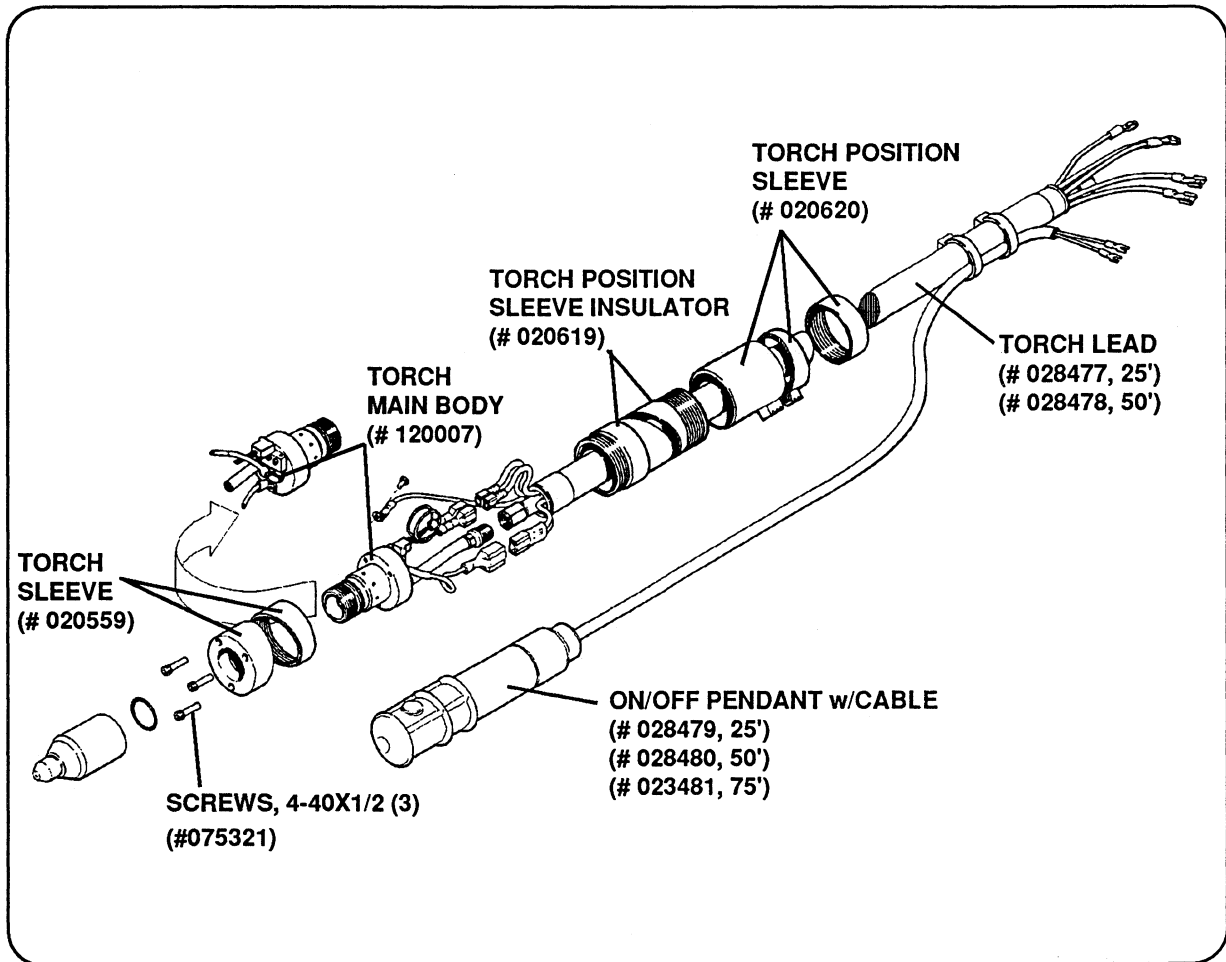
PAC121M Machine Torch Assembly - Exploded View
